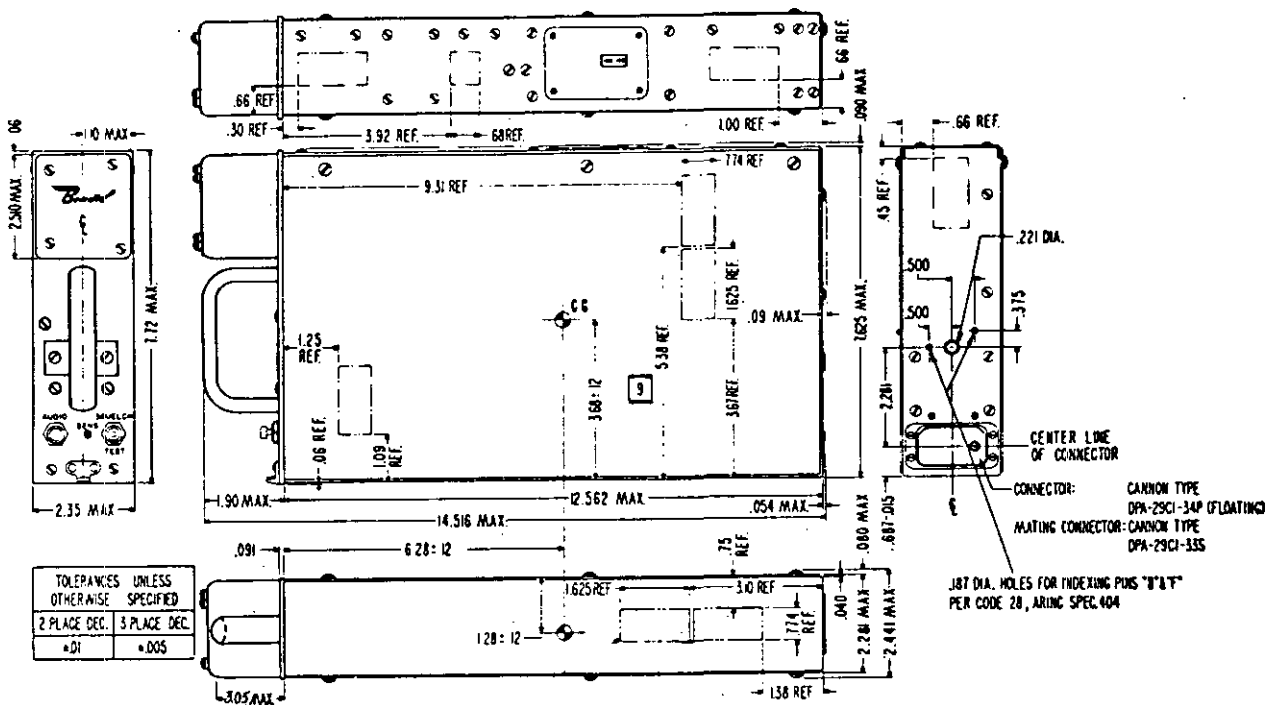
Receiver, Radio R-1185A/ARC-101, Outline Dimensions
